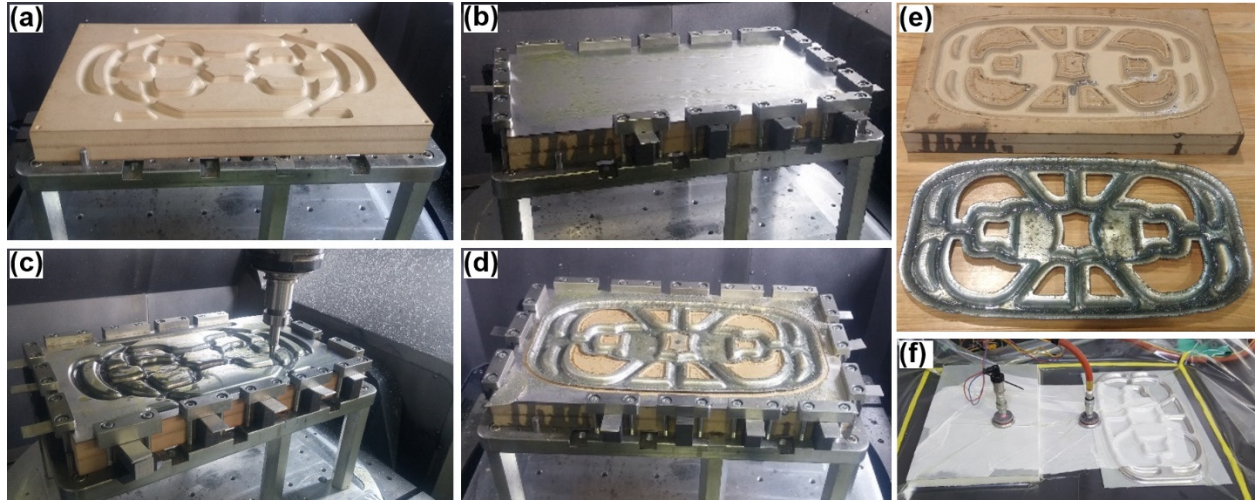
The prototyping process: (a) 3D-routed MDF die of the support shape is (b) clamped underneath a 1 mm aluminium sheet in a CNC mill. (c) A hemispherical tool incrementally forms the support shape, before (d) the support is cut from the metal and (e) removed from the mould. (f) The scale facet is then vacuum-formed over a spherical mould.
